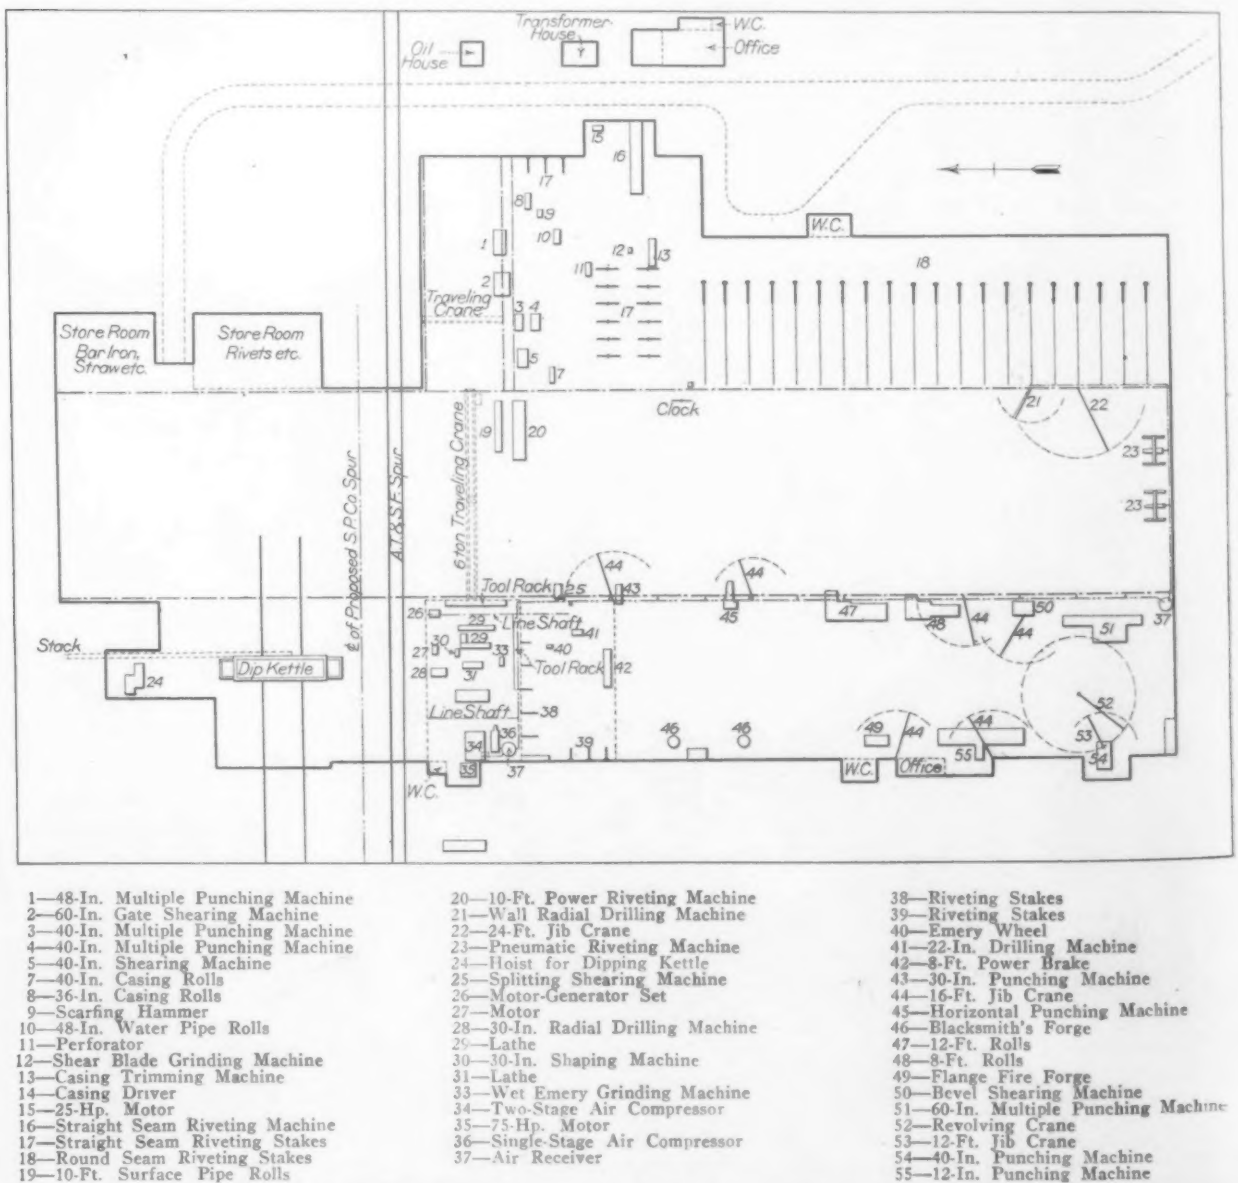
GROUND PLAN OF THE RICHMOND PLANT OF THE WESTERN PIPE & STEEL COMPANY.
